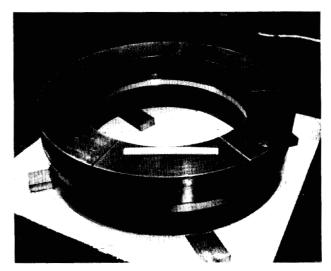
Pole-tip ring assembled prior to being cut into six 60° sector magnets.
